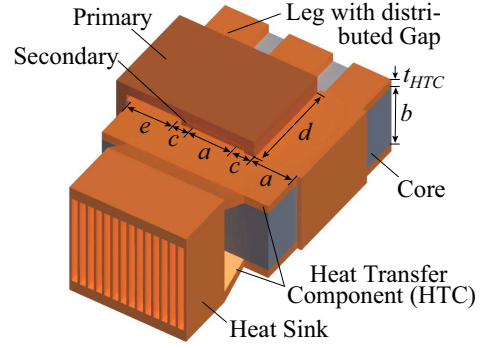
Geometry of transformer with integrated series inductance and heat transfer component (HTC)/heat sink for cooling.
